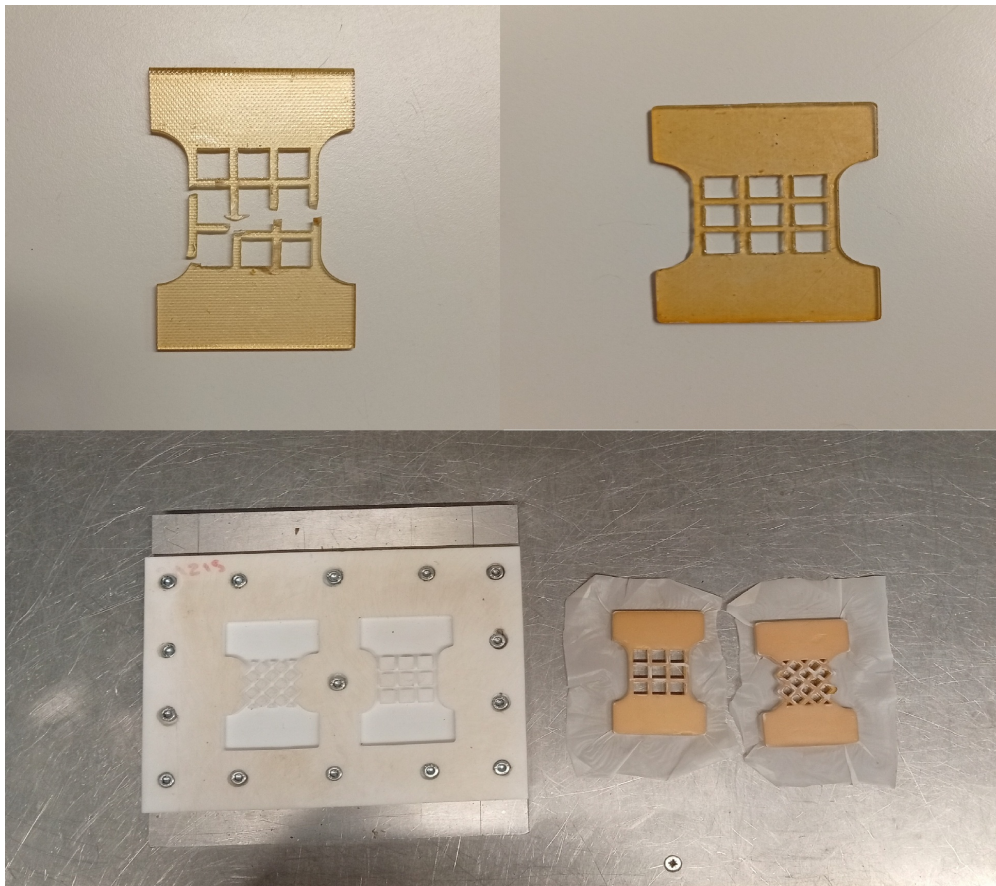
A fractured meta2 specimen, the same specimen after the healing process, and the mold with the healed specimens directly after heat pressing.
